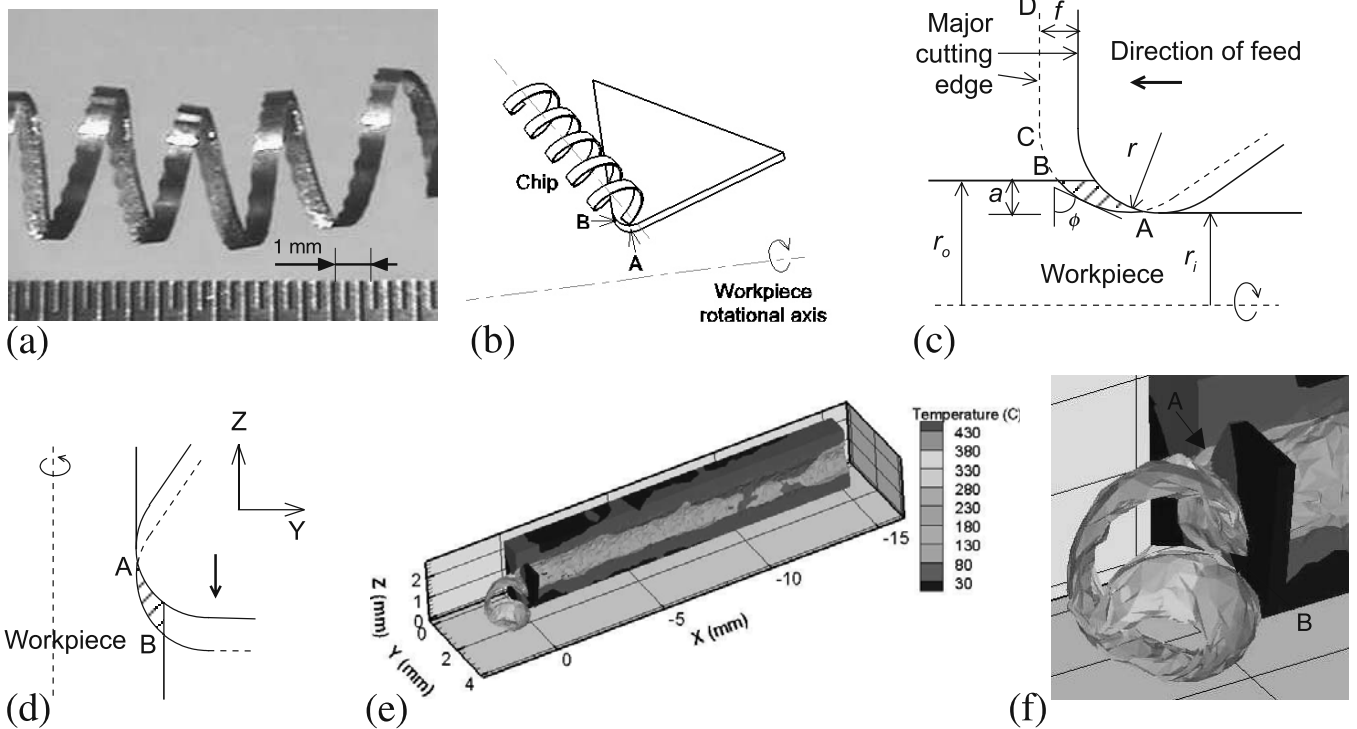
f. Chip curl with 0.254 mm depth of cut, 48.8 m/min cutting speed, 0.254 mm/rev feed, and 0.8 mm tool nose radius: a tubular chip in the experiment, b up-curl dominated chip, left-handed tool, and rotational axis of workpiece, c top view of the left-handed tool and uncut chip cross-section, d top view of the right-handed tool and uncut chip cross-section, e up-curl dominated chip, and f close-up view of the curled chip
